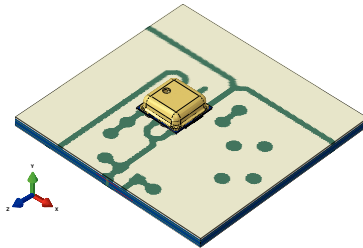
MEMS sensor package soldered on a PCB for local simulation modeling.
